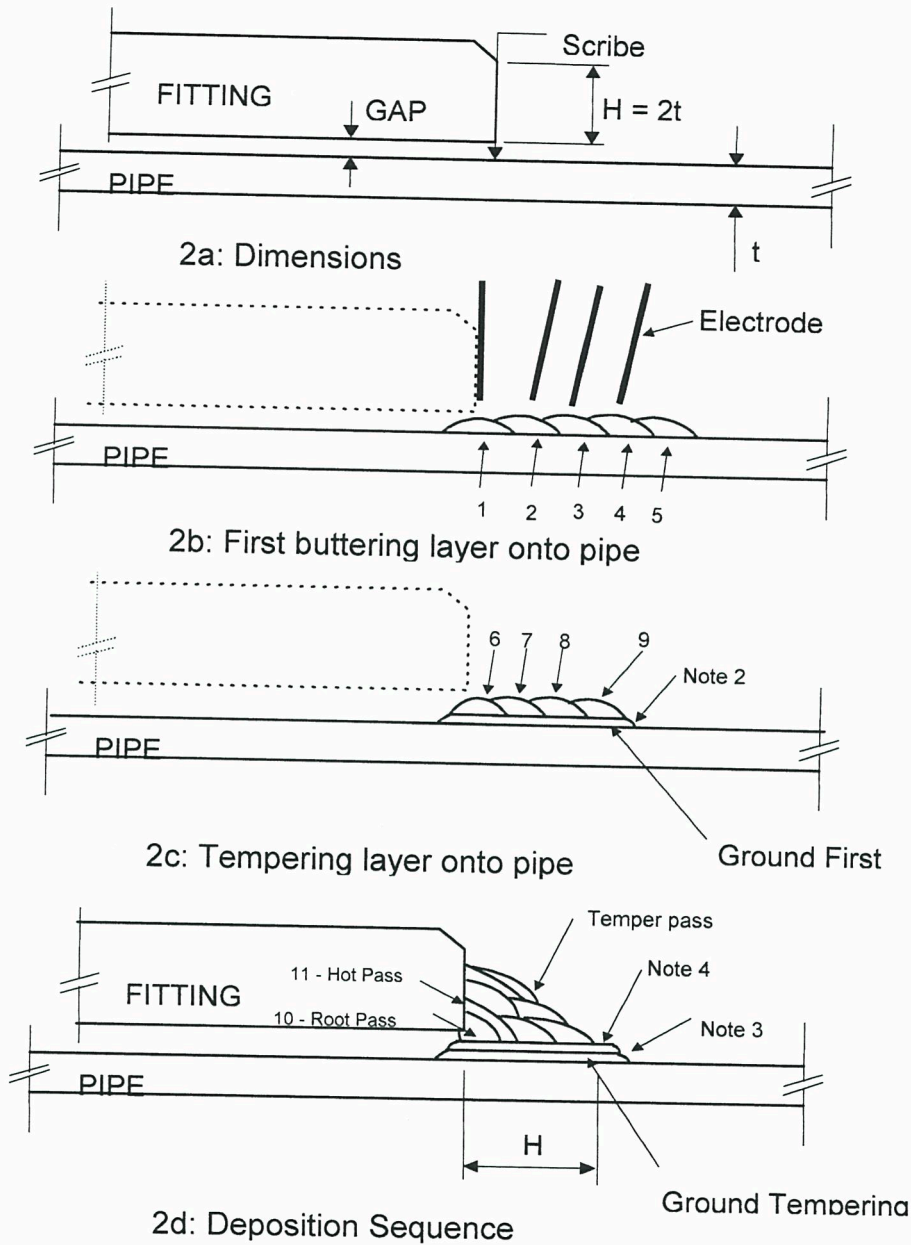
WELDING DETAIL AND SEQUENCE – STUB BRANCH CONNECTION WELD
